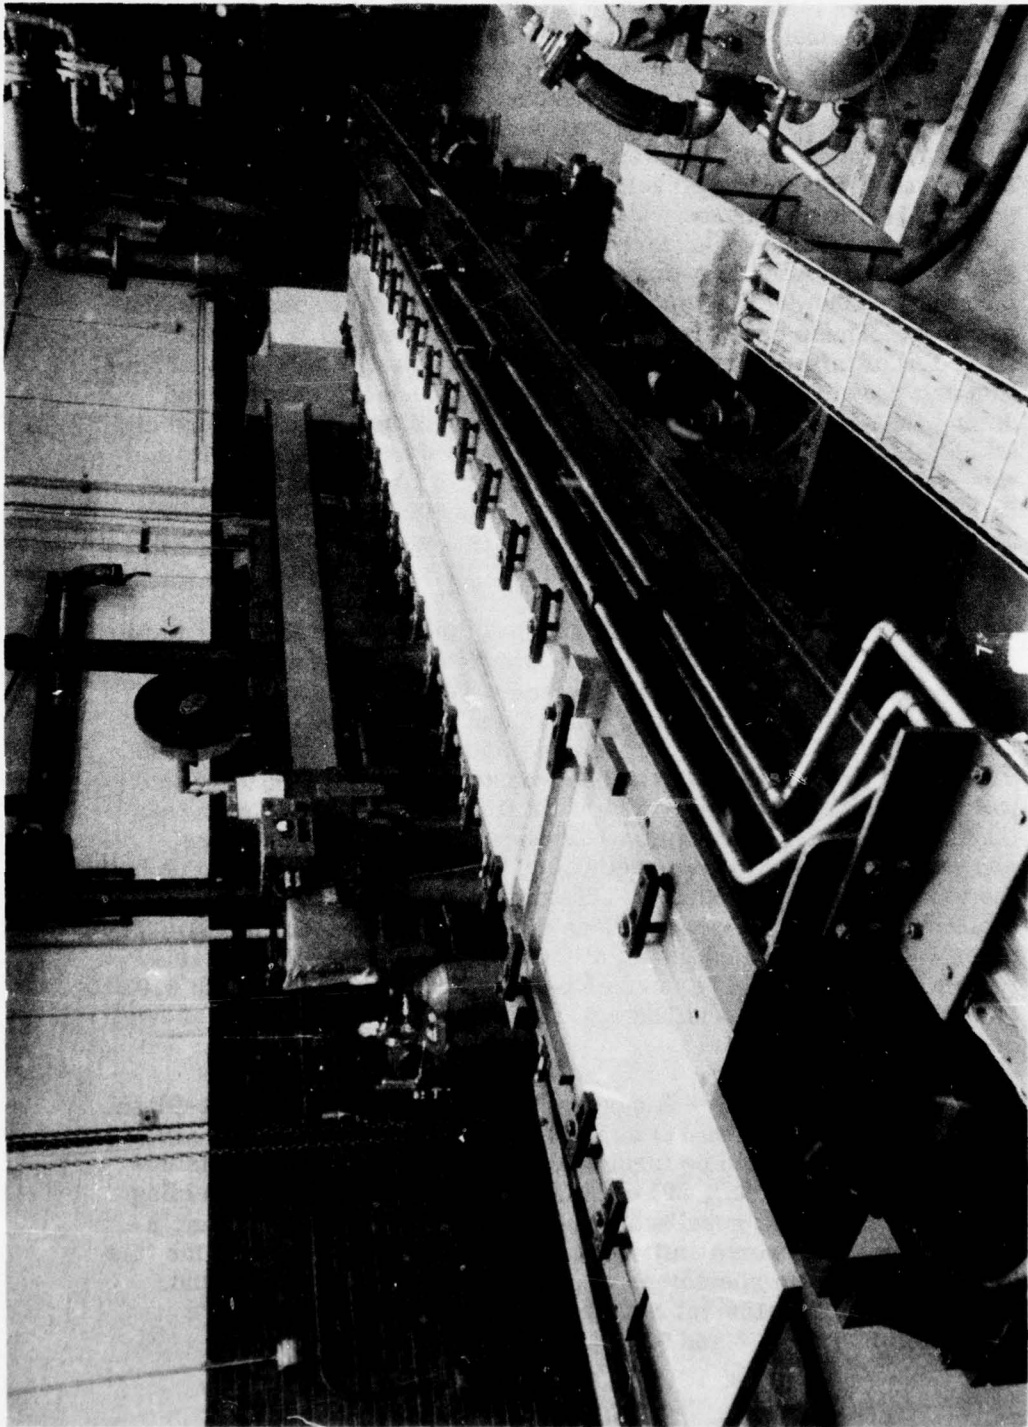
12-Foot-Long Aluminum Butt Weld Setup
